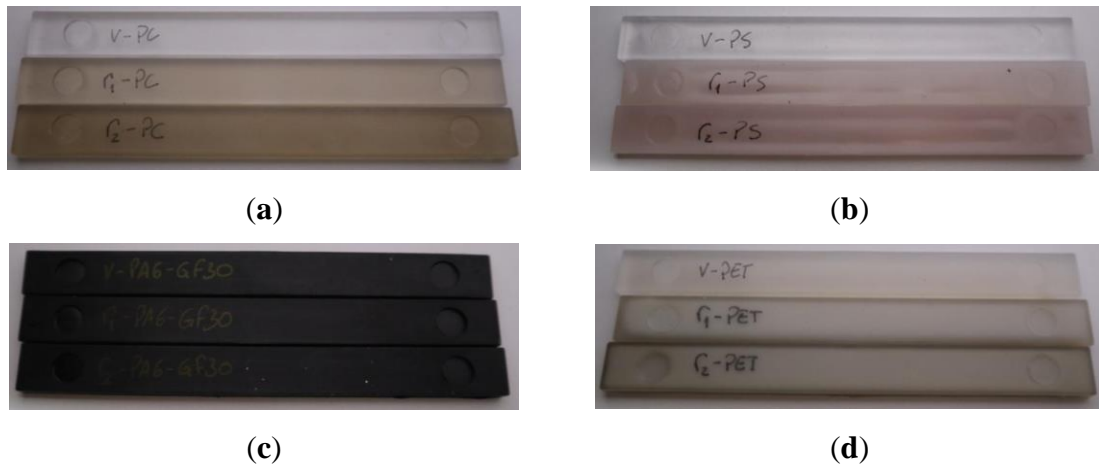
Examples of the injection-moulded specimens: (a) PC; (b) PS; (c) PA6-GF30; (d) PET.
